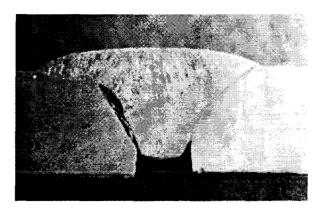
Cross Section of a Partial Penetration Groove Weld with Heavy Slag Inclusion
